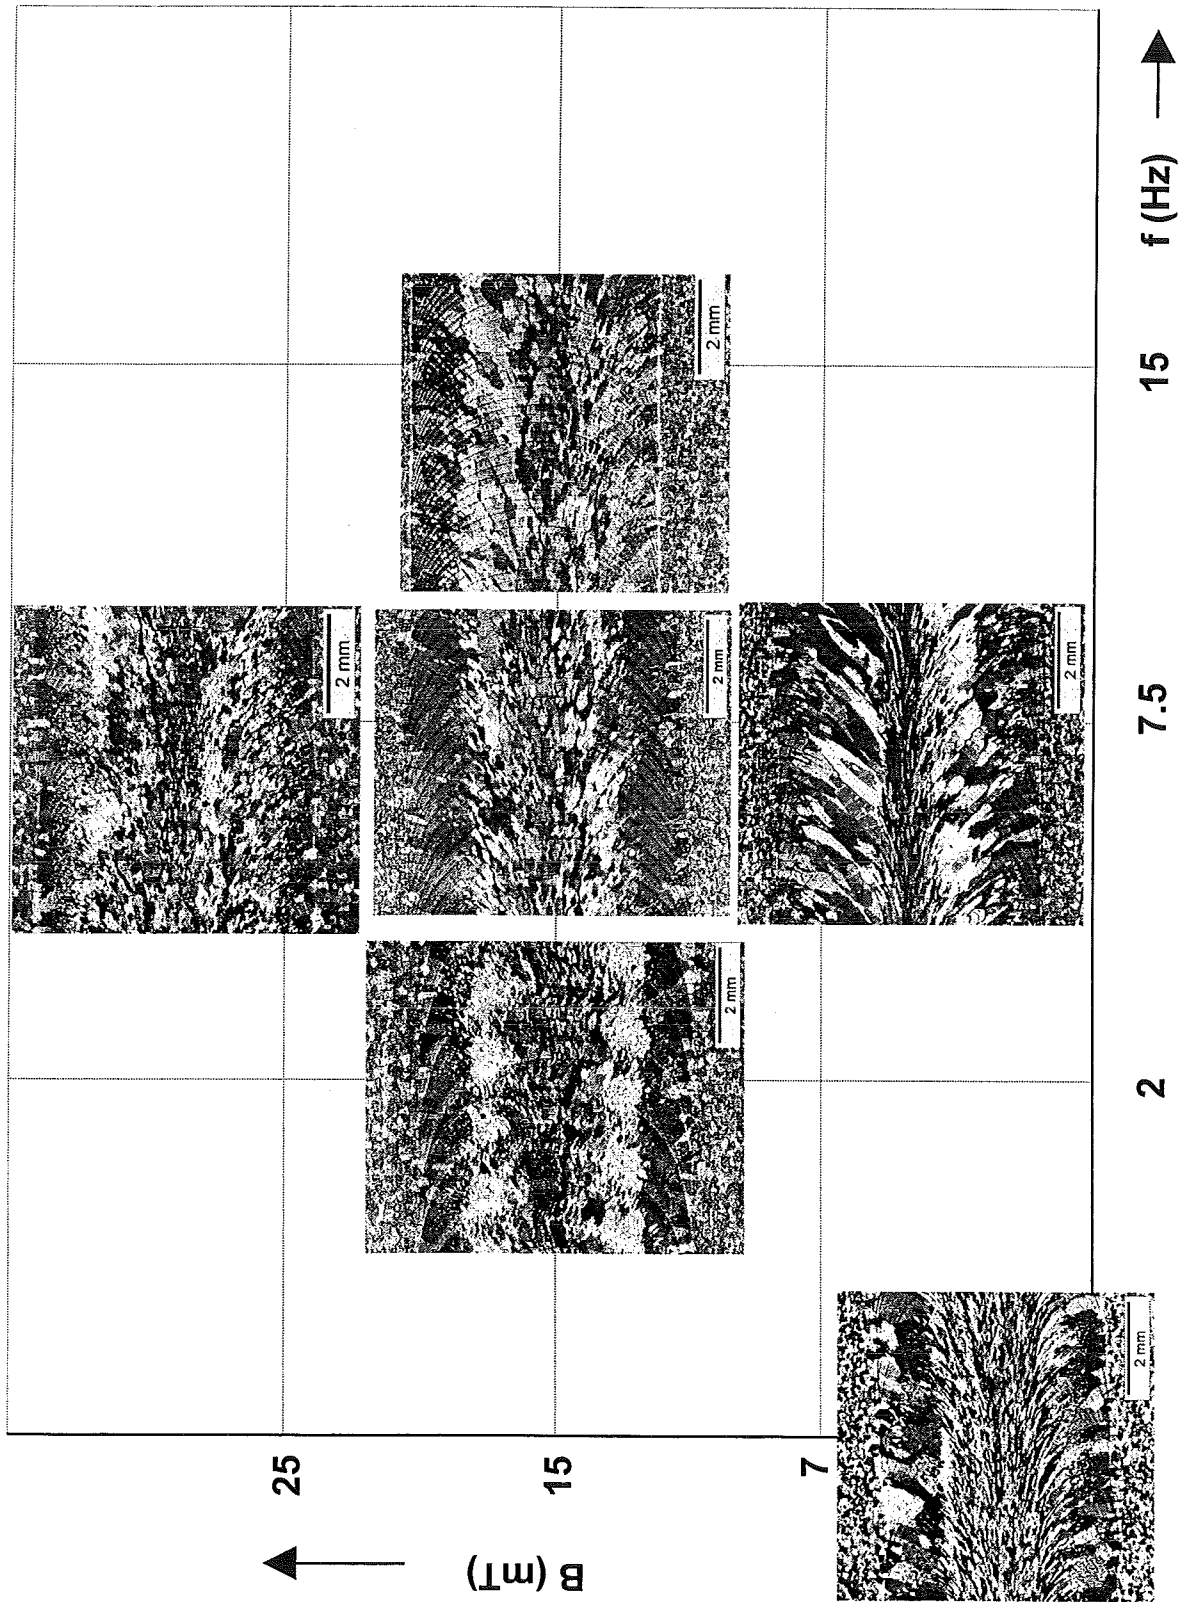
Top surface of AA 6061 thick plate welds with and without EMS.
